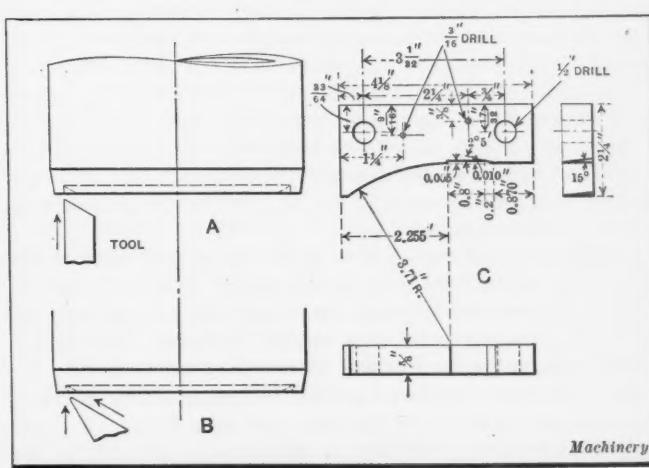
Method of cutting Groove for Brass Plate, and Detail of Forming Tool used for finishing Nose
